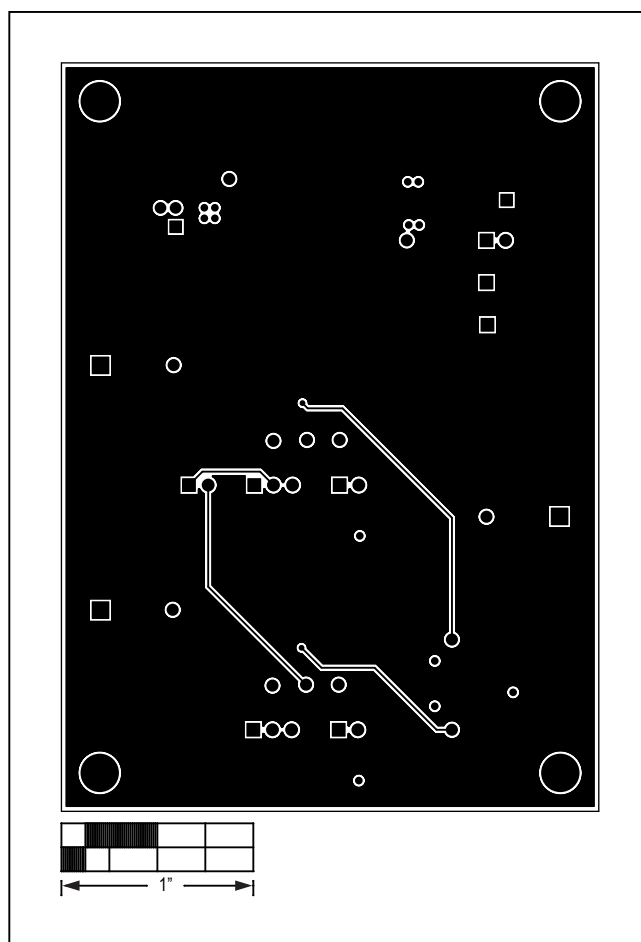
MAX14670 EV Kit PCB Layout—Solder Side
